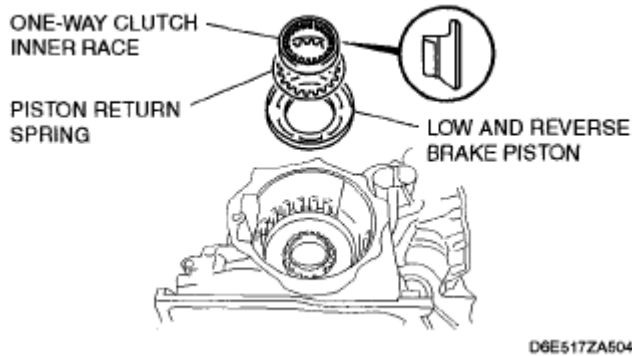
View Of Piston Return Spring, One-Way Clutch And Transaxle Case
